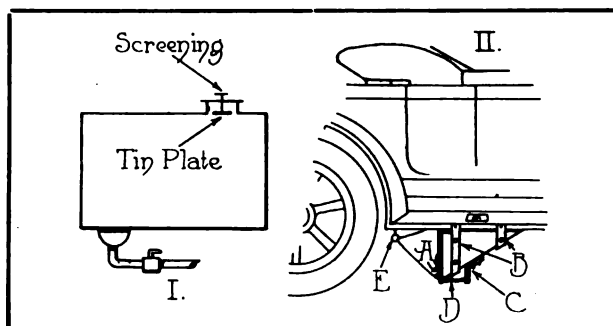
I, Location of a Valve for Gasoline Tank Vent; II, a Home-Made Sand Box Attached to the Running Board.
